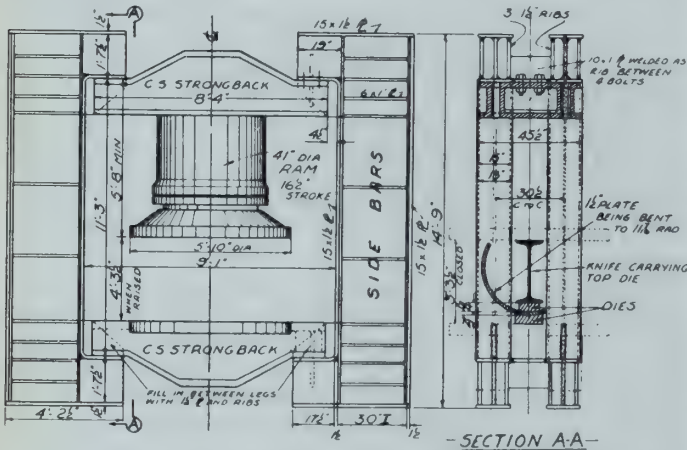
General arrangement of original 1,000-ton press showing welded side bars.
